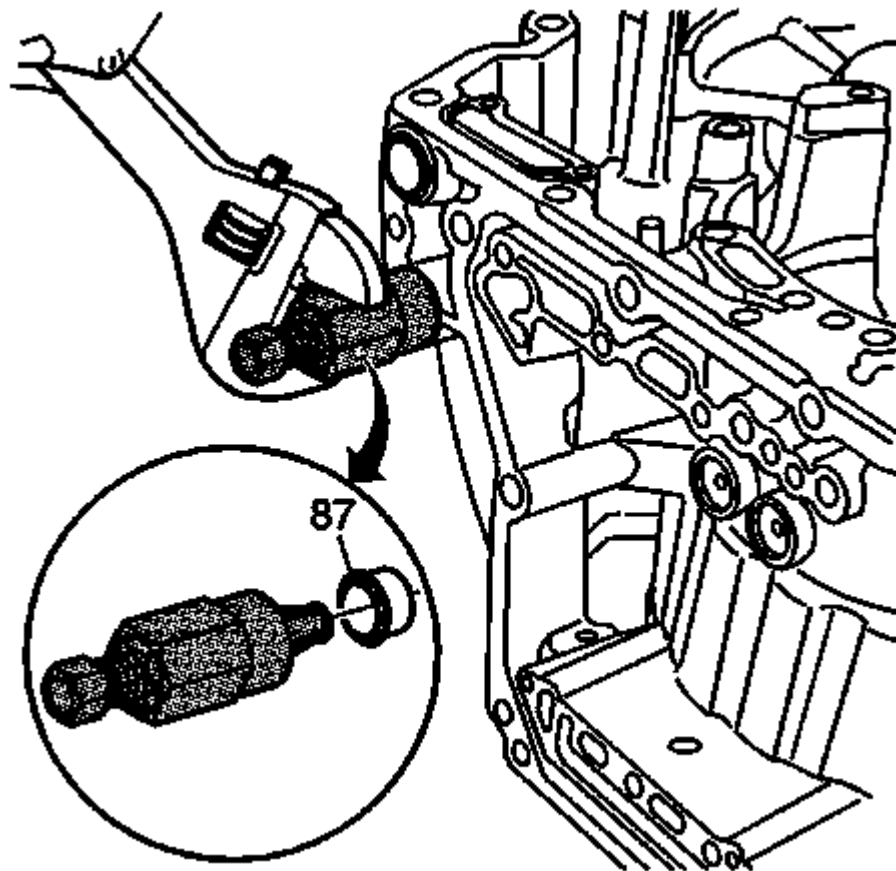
Installing Valve Into Bore No. 2 Of J 44246
